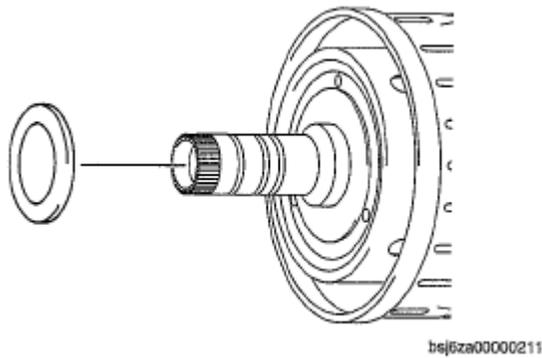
Identifying Thrust Needle Bearing On Clutch Hub
